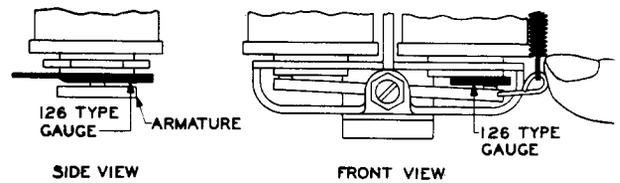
Method of Checking Airgaps on Ringers Without Stop Screws Having Solid Stop Pins
